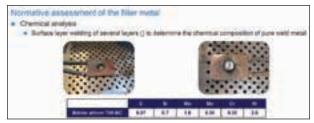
Normative requirement for determining the chemical composition of welding consumables.
